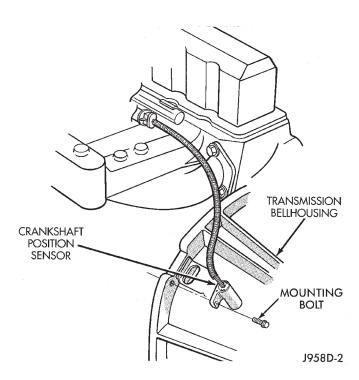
Crankshaft Position Sensor—4.0L Engine
